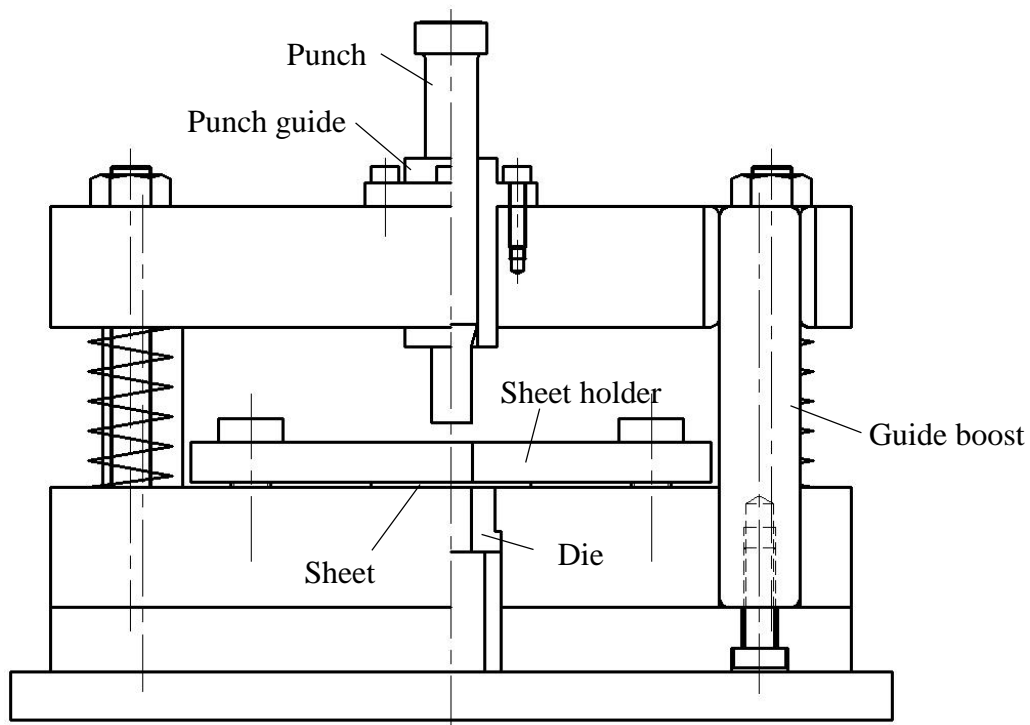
Tools used for punching and thickening of hole edge of high strength steel sheets.
